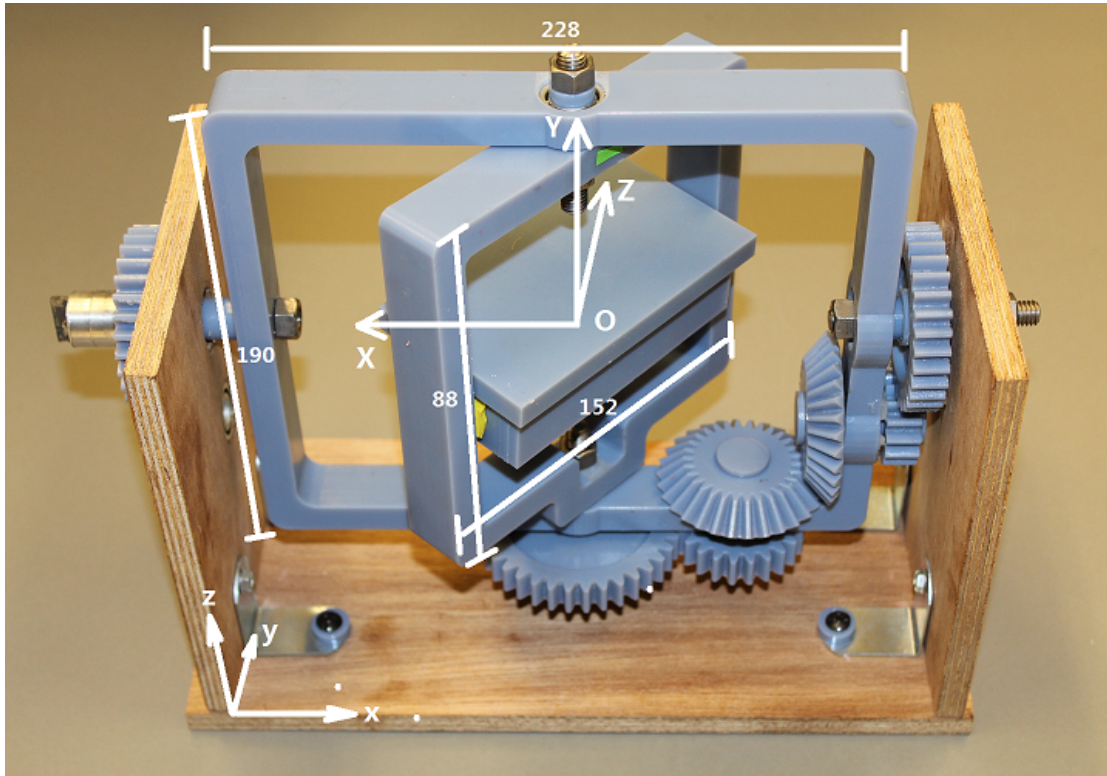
Rotational casting machine with dimensions (in the unit of mm) and coordinate systems.
